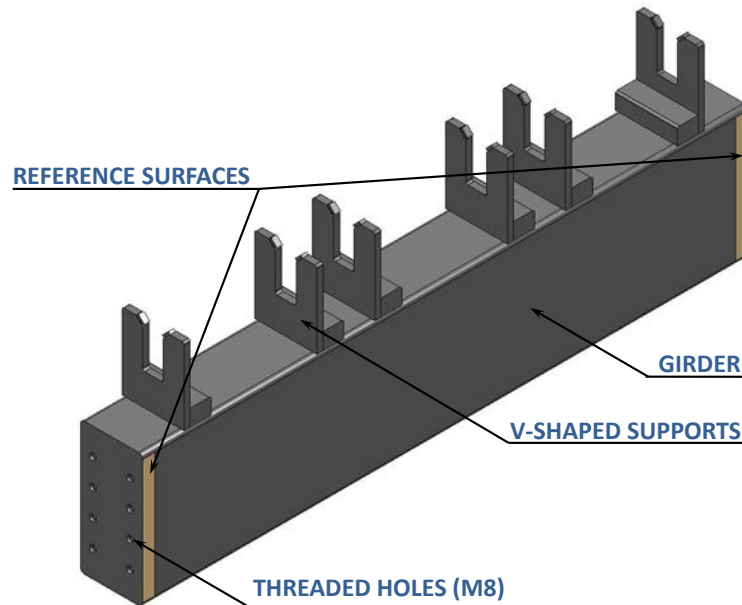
Final precise machining of the V-shaped supports (StSt) under dummy loads for the fabrication Case C
